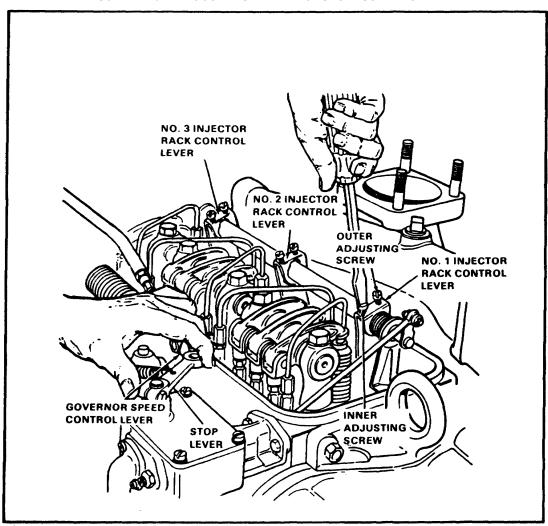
ADJUSTING THE INJECTOR GOVERNOR LEVER
